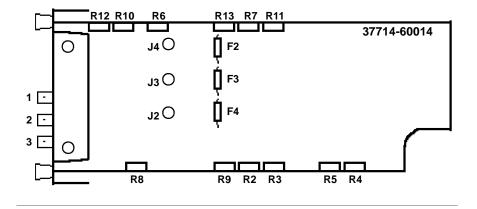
Multiple Outputs Assembly Adjustable Components
